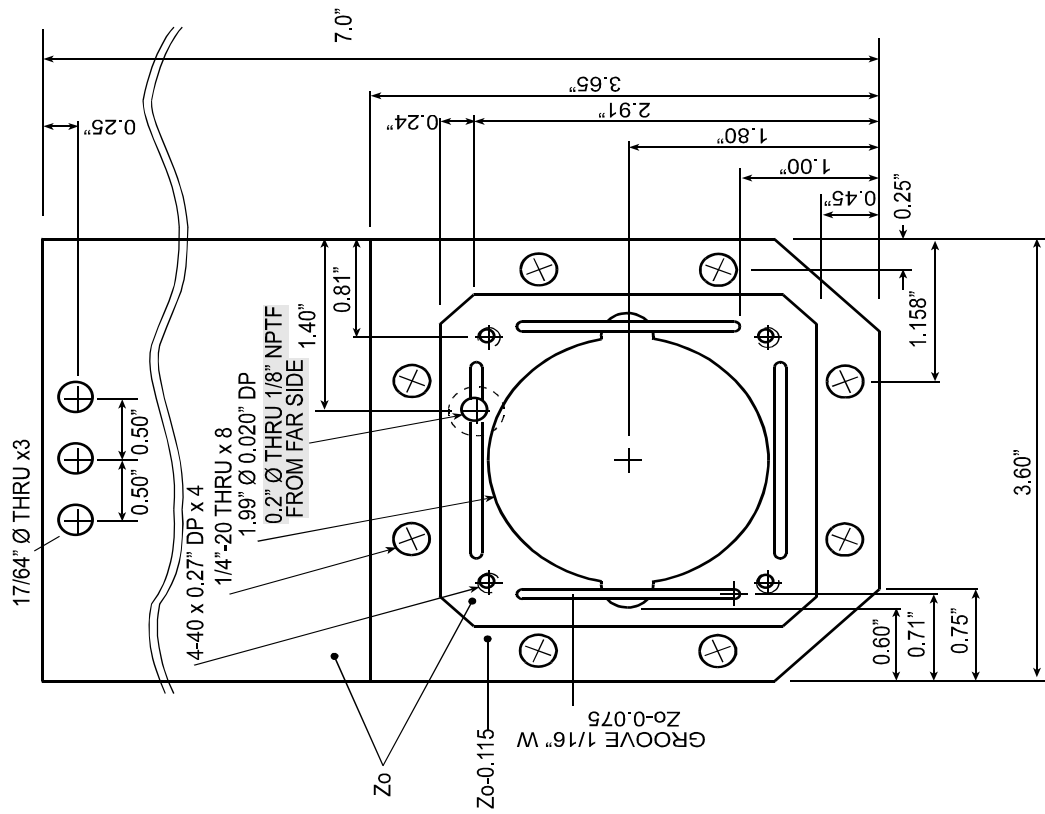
Full wafer o-ring sealing plating fixture. N.B. that recess dimensions have to be increased to accommodate 50.8 mm diameter wafers.
